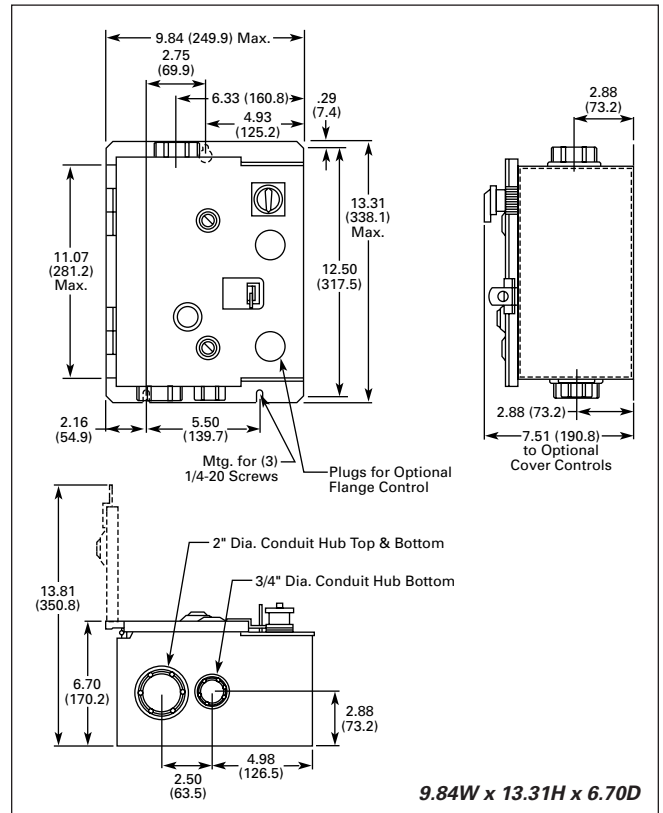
Box 5, Type 4X — Approximate Dimensions in Inches (mm)
